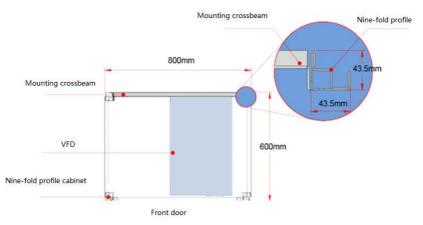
Top view of mounting a MSI270 280–500kW VFD in a cabinet
